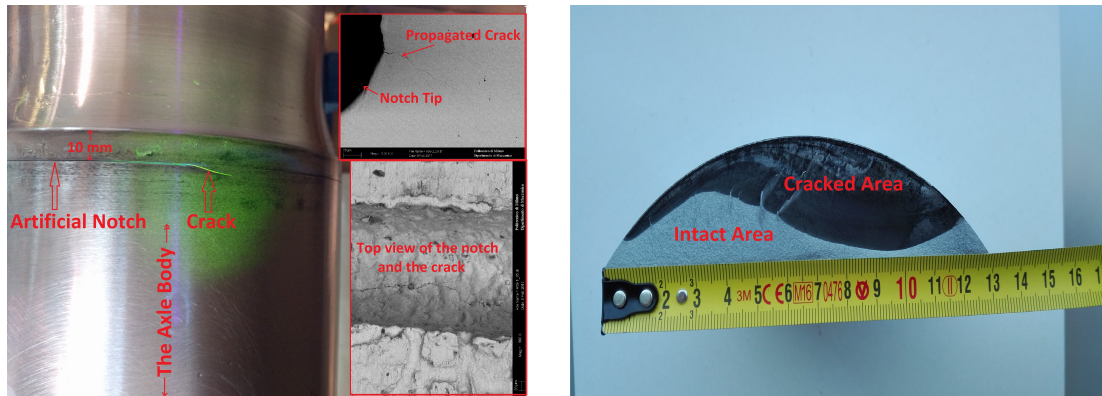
Cracked section of second test specimen (left: propagated crack from the artificial notch; right: portion of the cracked cross-section).
